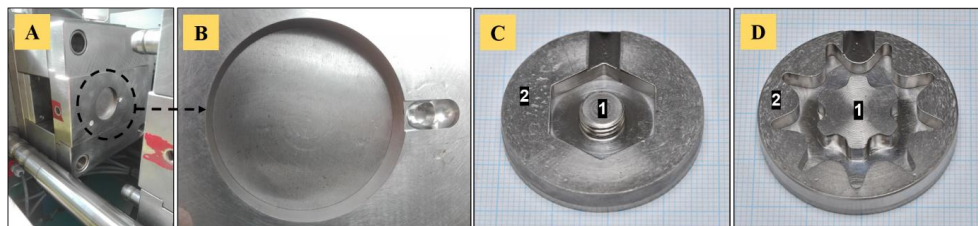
4: PIM molds for the BOY XS injection molding machine: (A, B) standard mold cavity, (C) two-part inserts for hexagonal nuts and (D) for 9-tooth sprockets.
